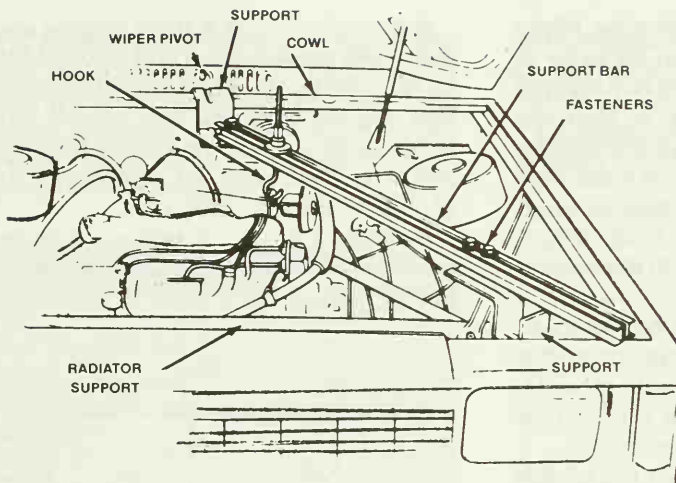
In some vehicles the engine is supported and the transaxle is removed from below the vehicle. (Chevrolet Motor Division of General Motors Corporation)
